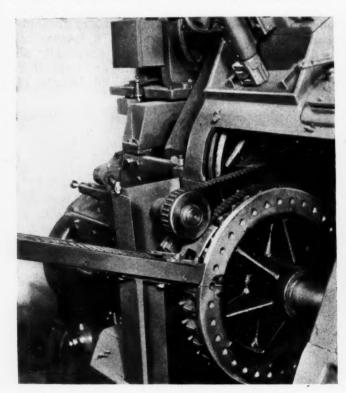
A Rotary Carrier with V-block Stations and a Chain Hold-down Mechanism for Grinding Shells
